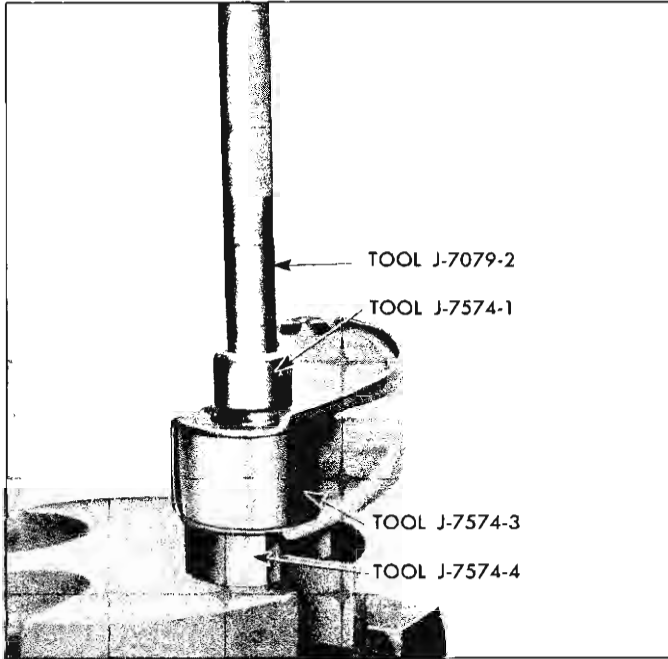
Removing Upper Control Arm Bushings (Rear Bushing Shown)
